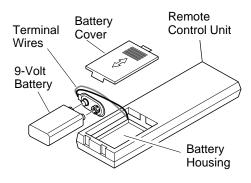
Installing Battery in Hand-Held Remote Control Unit
